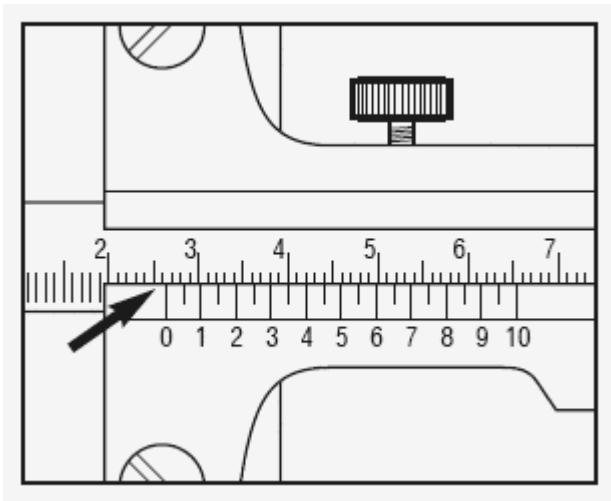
Identifying Read Measurement, Zero Mark On Left End Of Vernier Scales
